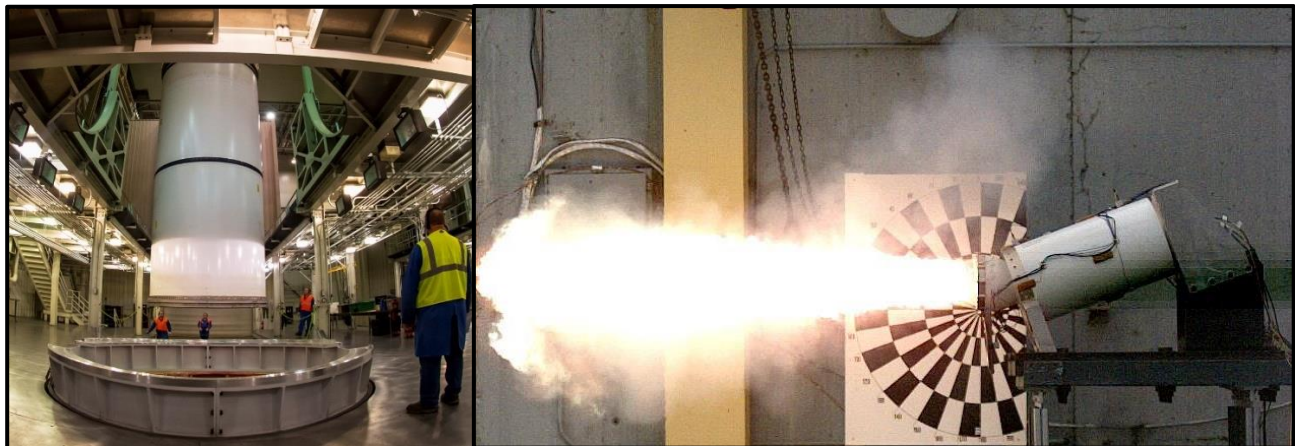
EM-1 motor casting at Orbital ATK (left), and booster separation motor test (right).
